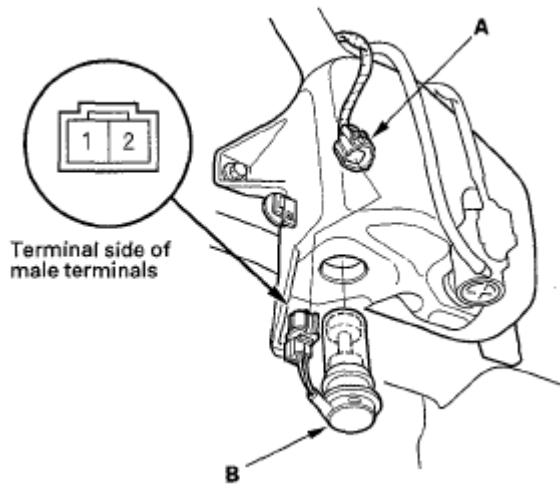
Identifying Washer Fluid Level Switch And 2P Connector
